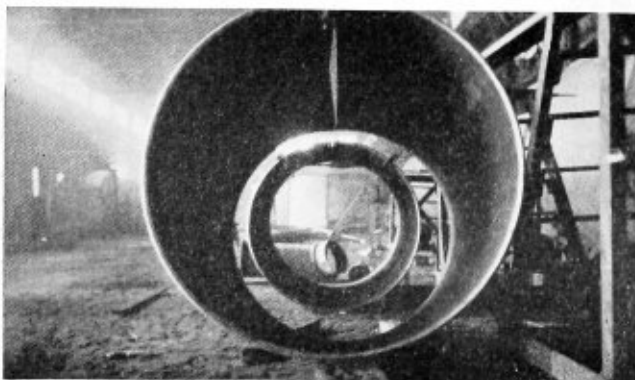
Method of spacing for tacking and welding longitudinal seams
